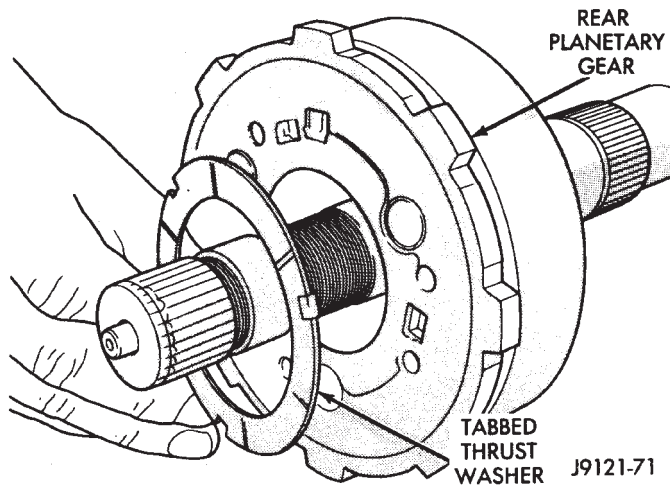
Installing Rear Planetary Thrust Washer (46RH)
